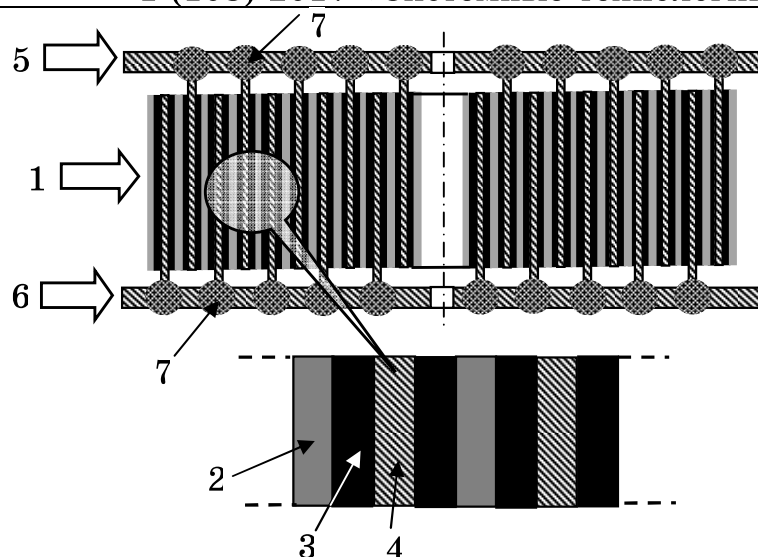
Charge-storing device (CSD): 1 – roll; 2 – strip of dielectrical separator; 3 - layer of porous material; 4 - strip of aluminum foil (anode or cathode electrode); 5 - cathode collector; 6 - anode collector; 7 - welding joint (places of welding)
